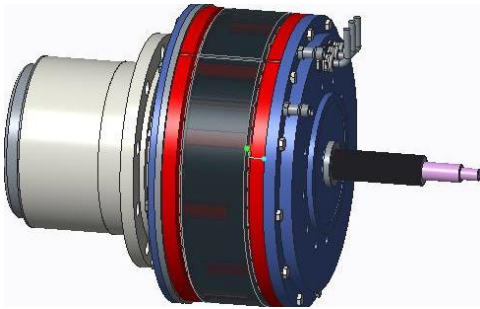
Structure of In-wheel Motor with Two Stage Planetary Gearboxes
